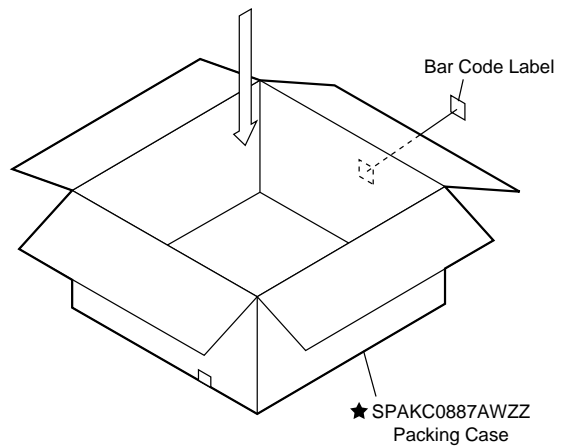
SPEAKER EXPLODED VIEW (2/2)
